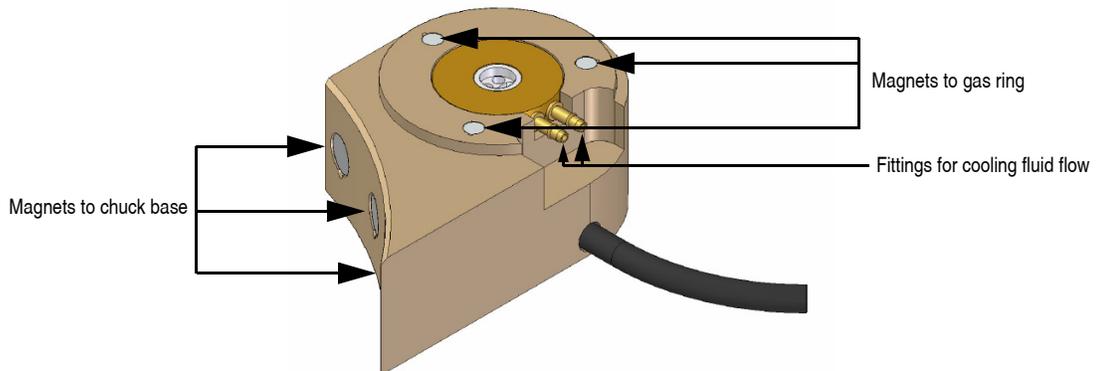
Dimension Icon Heater/Cooler magnetic base
